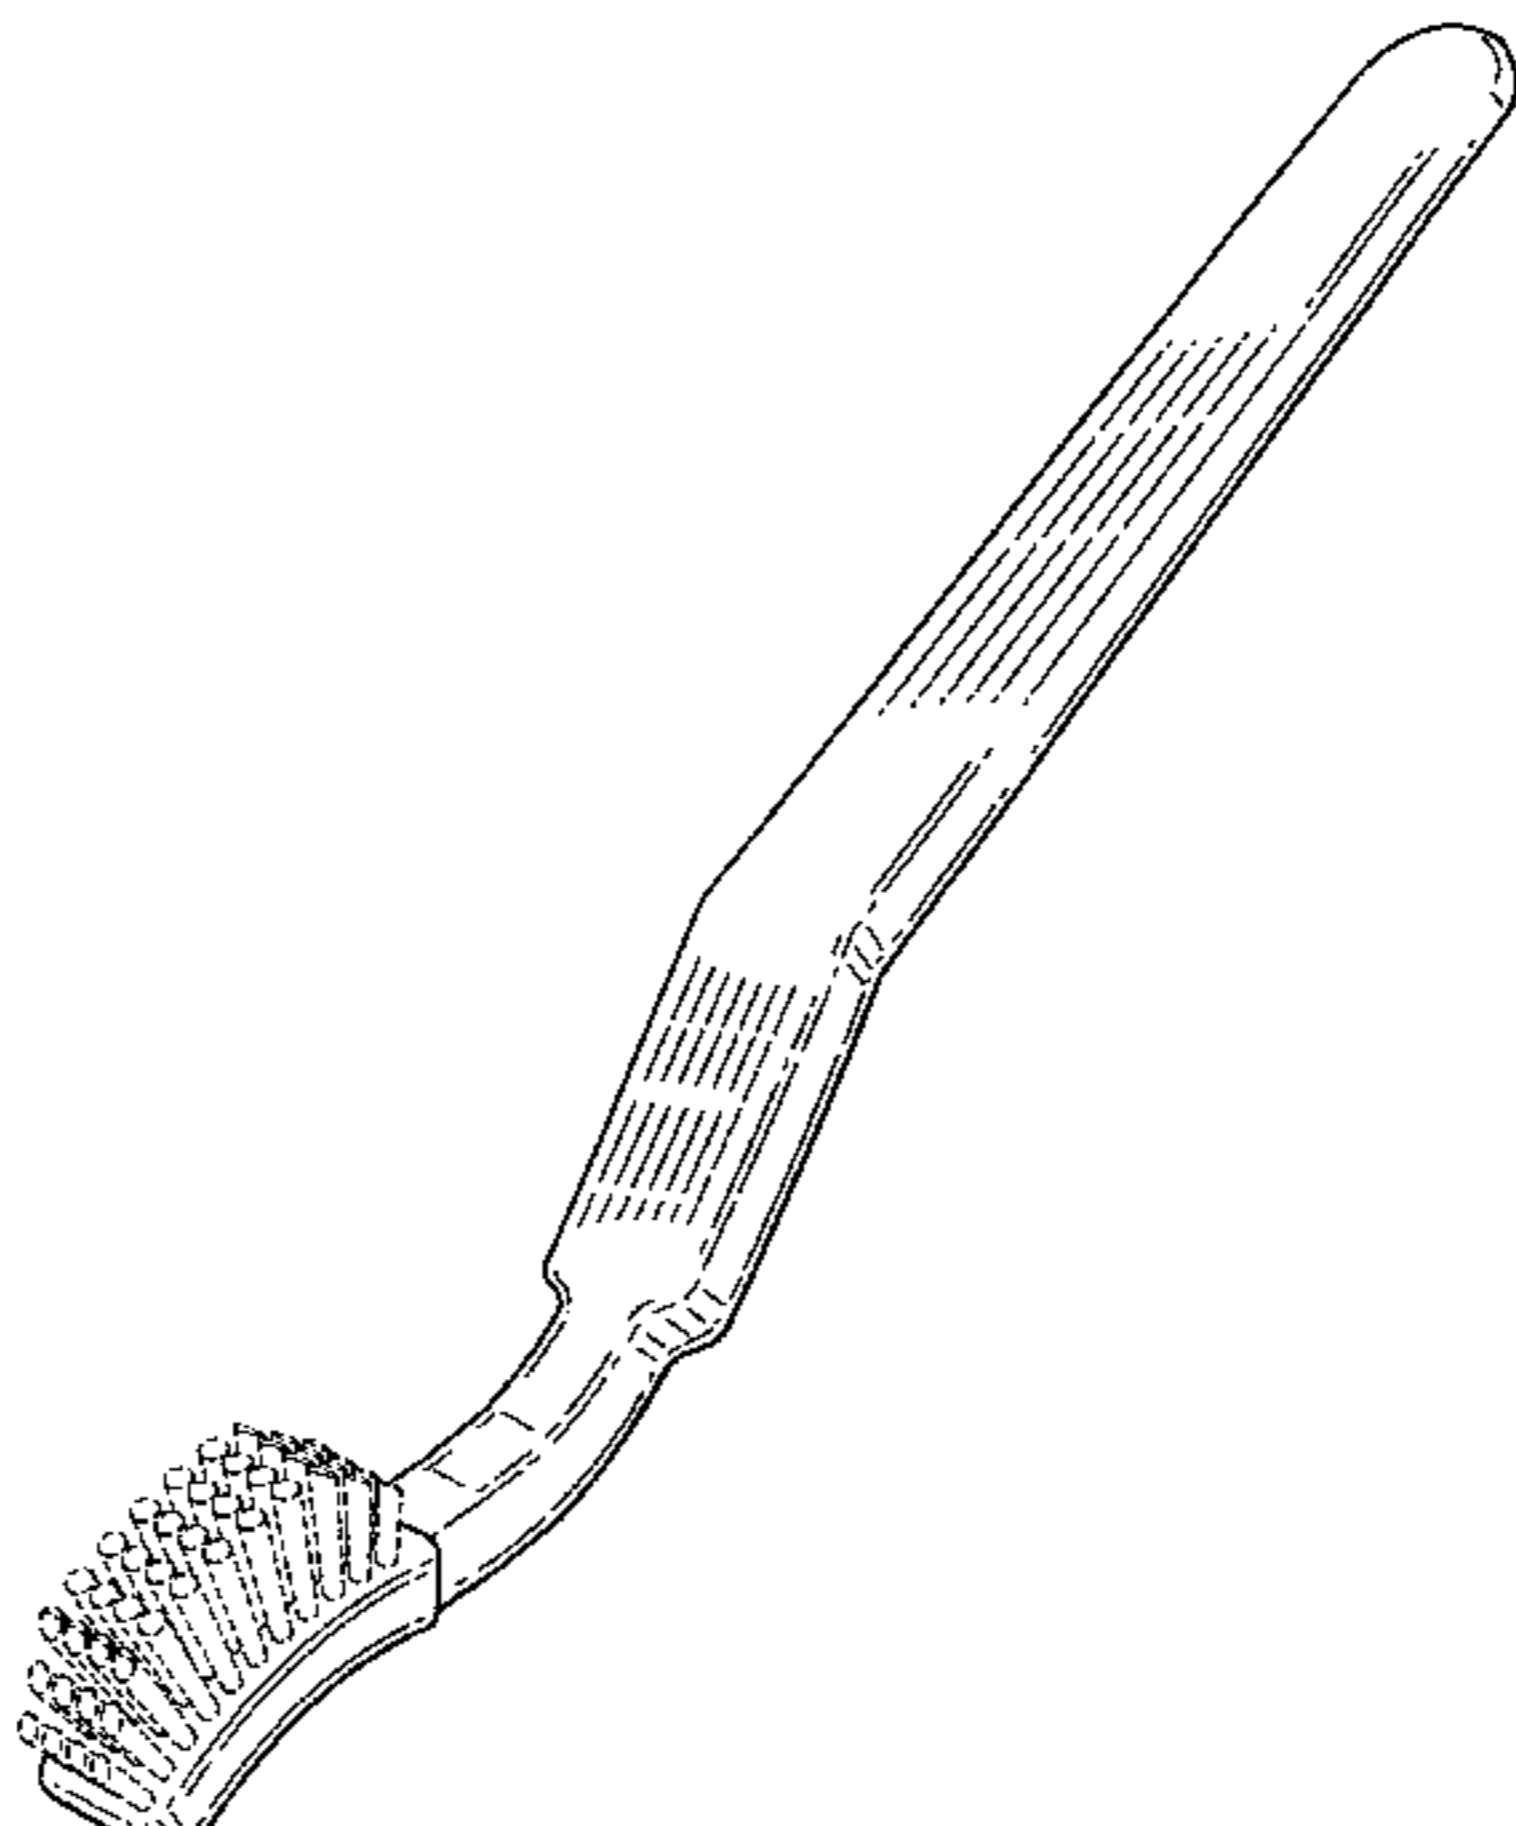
is a left side elevational view of the design shown in FIG. 8;
